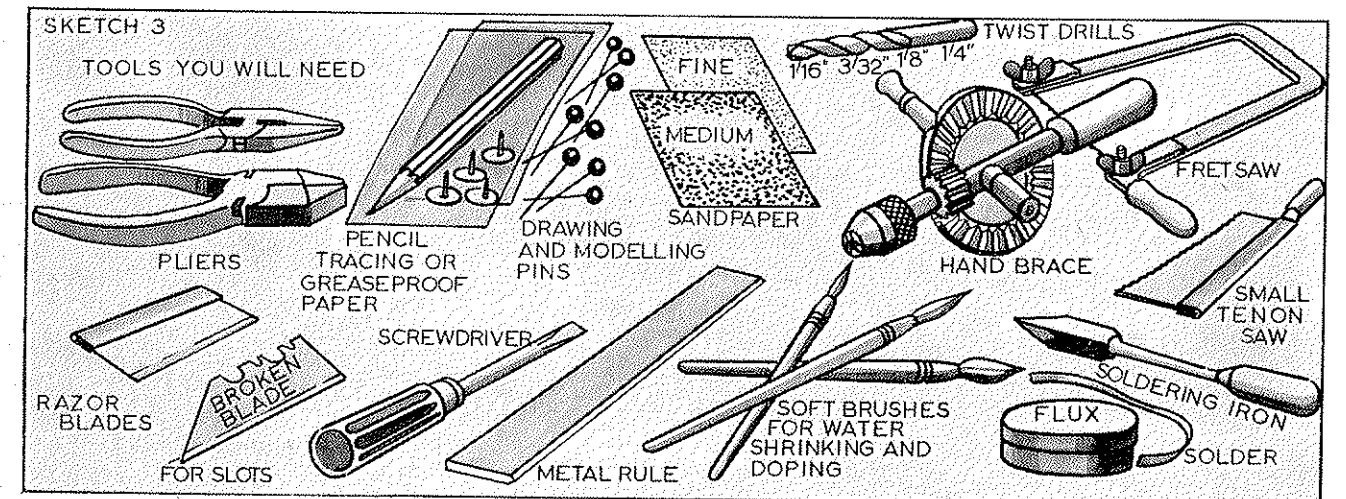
shows the tools you will require. Not shown is a good, perfectly flat piece of building board. An old drawing board 22 in. x 15 in. will be excellent. A smooth flat plank or kitchen table will do instead—DO NOT use your mother's pastry board! Essential tools only are shown in the sketch. At your model shop you will find all kinds of specialised tools, such as balsa knives, planers, strippers, etc. Excellent indeed, but not ESSENTIAL for you as a beginner.
